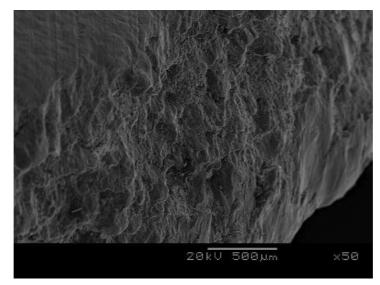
Fracture surface adjacent to bolt hole, position A (x50, SEM).
